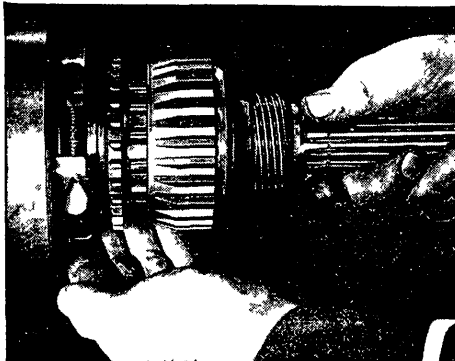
Pull shaft to rear, holding hand and rollers to catch them as they fall
